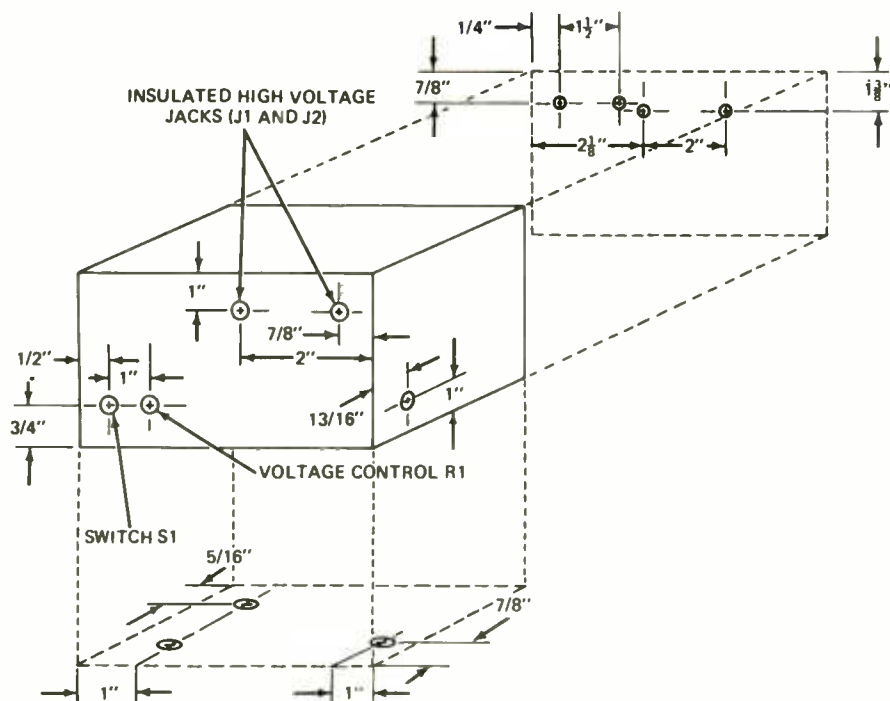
DRILLING PATTERN for mounting the components in the 3 x 4 x 6 inch hinged-top cabinet. Before drilling, make sure all parts fit properly — especially if you've made changes.
